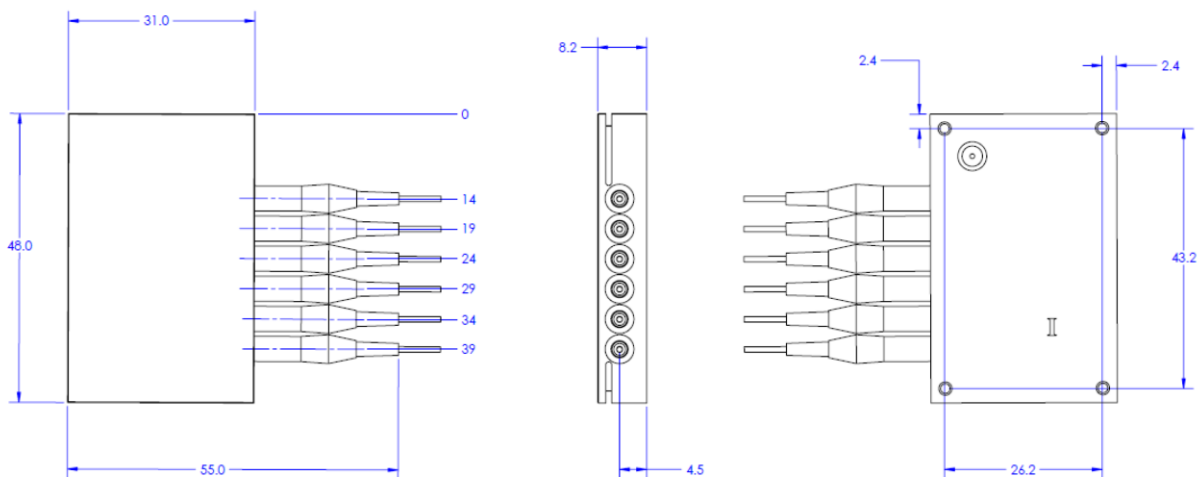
, Mechanical Drawing of 90deg Optical Hybrid
